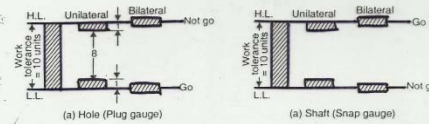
Allocation of Manufacturing Tolerance.
